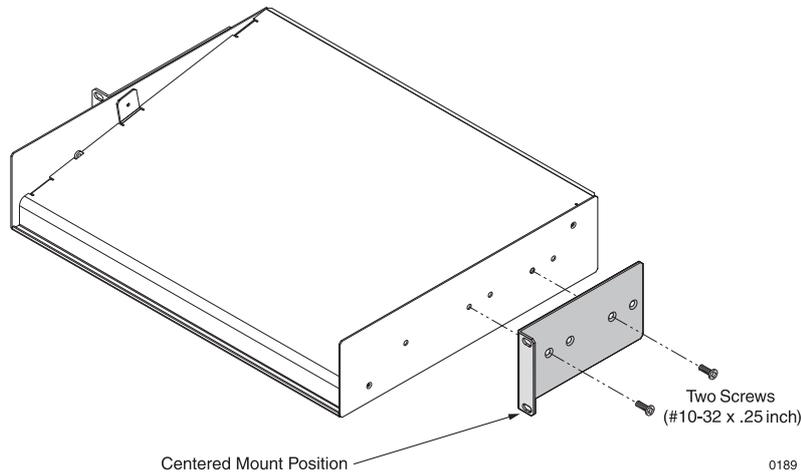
Installing Air Ramp Brackets for the Centered Mount Position
